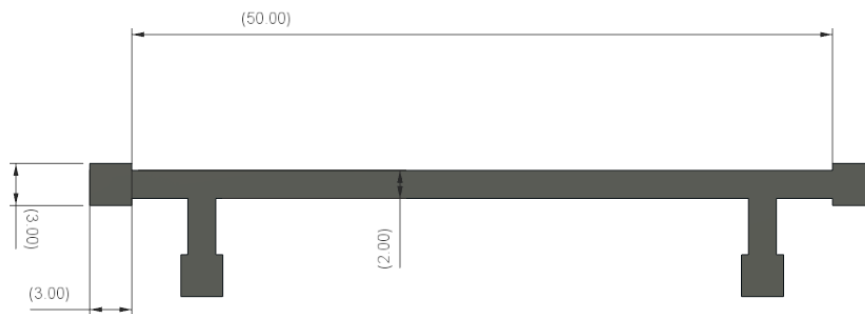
4-point probe resistance measurement CAD drawing with dimensions labelled in millimeters.
